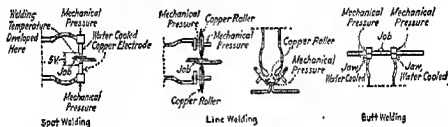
Diagrams of Circuits of Butt, Spot, and Seam Welding Machines.
